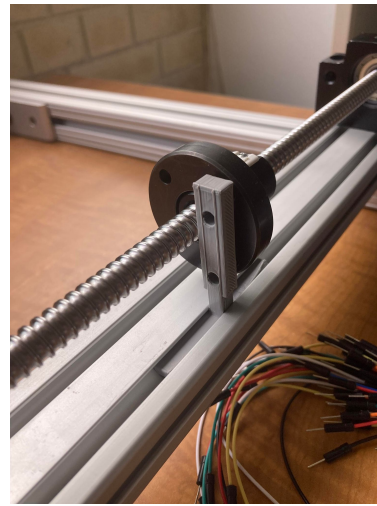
The stabilizer designed to slide along the cross beam. Holes in the element align with holes in the flange allowing the two to be connected. This prevents the flange from spinning with the ball screw while allowing longitudinal mobility.
